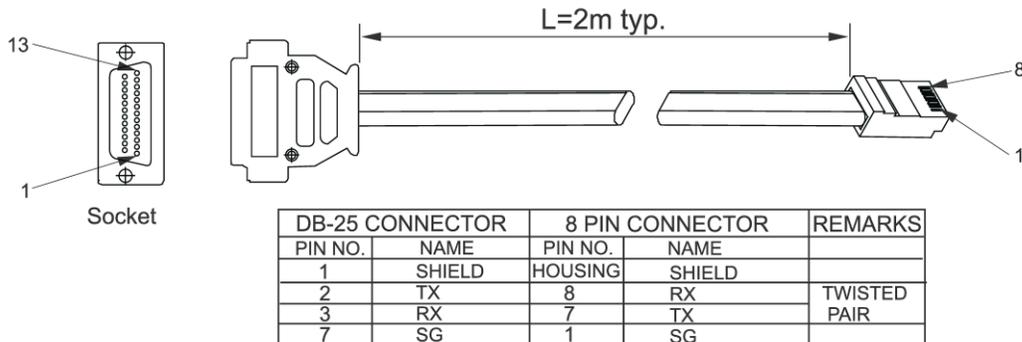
RS-232 Cable with DB25 Connector (P/N: GEN/232-25)
